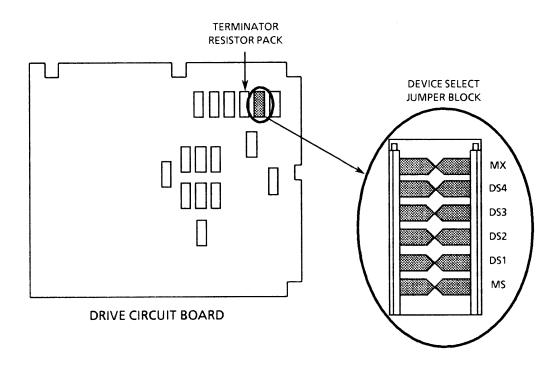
Drive Address Select Jumper Block and Terminator Resistor Pack
